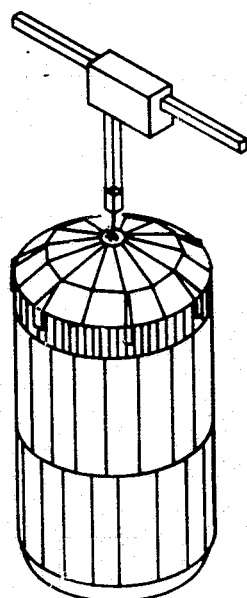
(Sheet 1 of 3). COMPLETE MANUFACTURING SEQUENCE, AMLLV/MLLV
